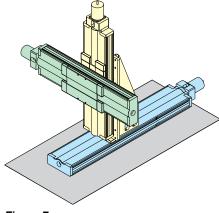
Three Axis (X-Z-Y) Horizontal Mounting
